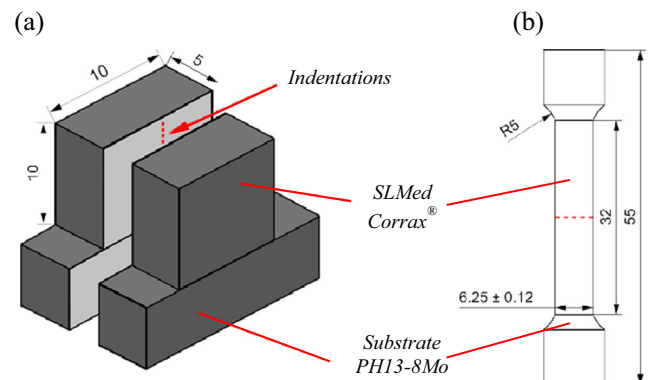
Specimens manufactured applying the hybrid concept. a Prismatic geometry used to analyze the hardness, density, and the melted zone. b ASTM 370 specimen used for tensile tests
